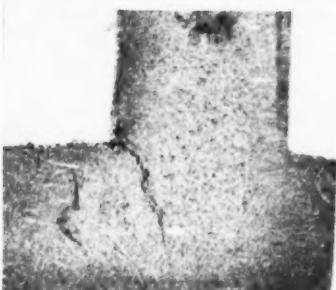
Section of casting showing tear induced by test block bonded with 2 pct linseed oil.
